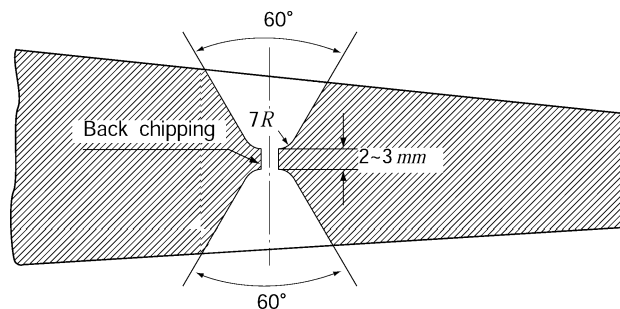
Edge Preparation for Repair Welding of Blade Edge
